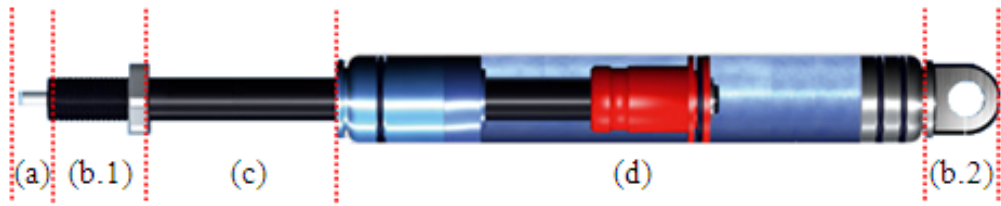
Gas spring components: (a) release pin (b) connecting parts, (c) stroke area and (d) body (Bansbach, 2012)
